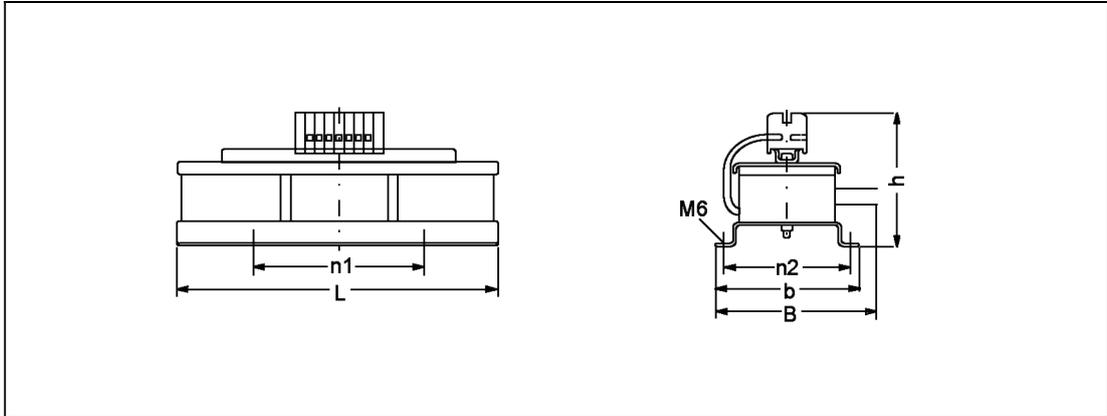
Dimension drawing: line reactor for Active Line Modules (up to 55 kW)
